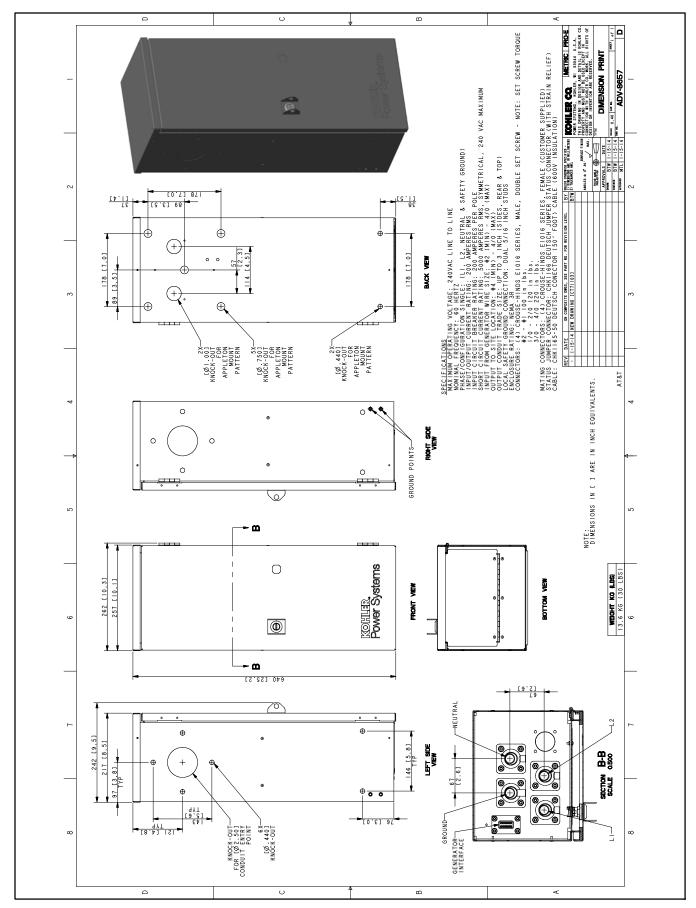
Optional Cam-Lock Box Dimension Drawing, ADV-8657
